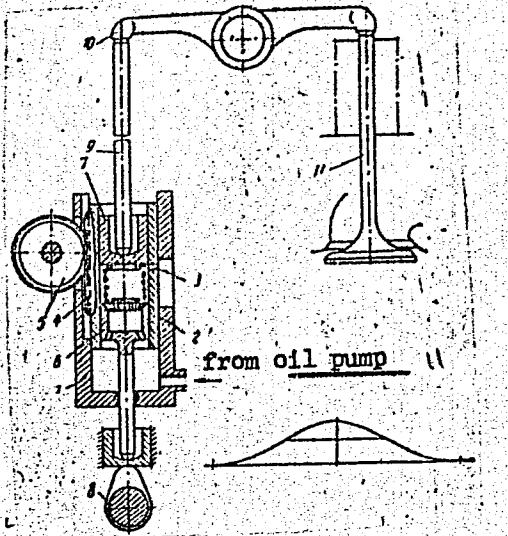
Hydraulic link. 1 - housing; 2 - intermediate sleeve;
